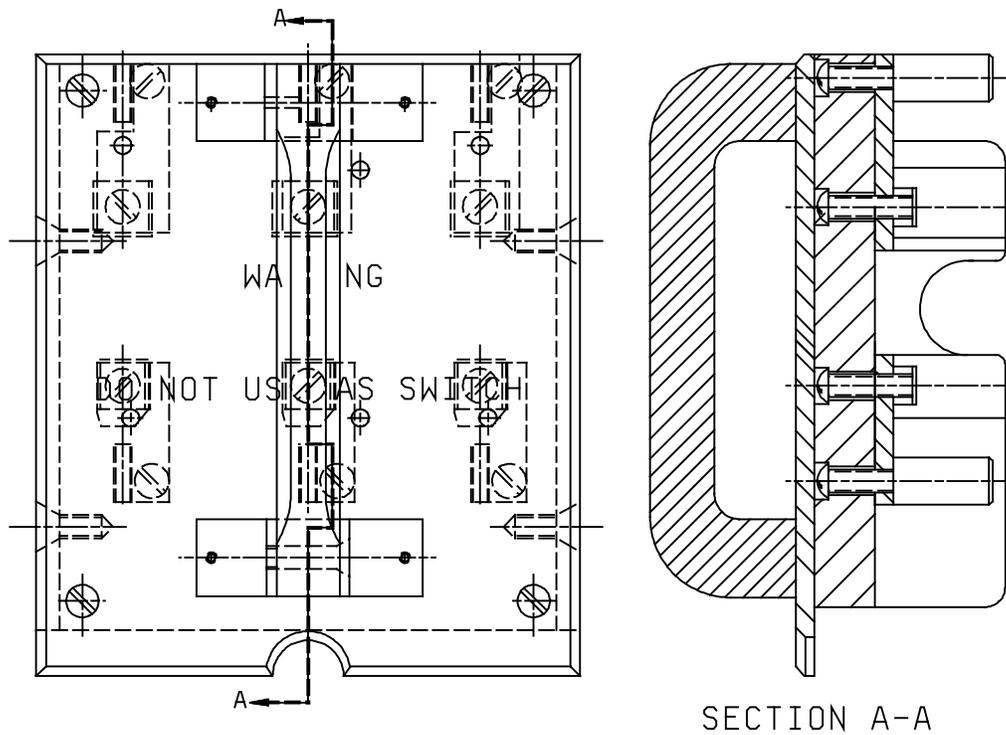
Fuse puller assembly, typical. Item No. 06
